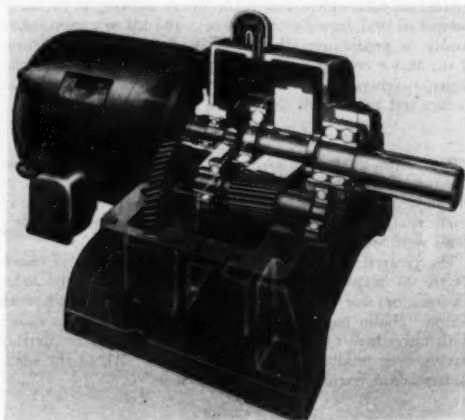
GEARMOTOR WITH HORIZONTAL SHAFT
